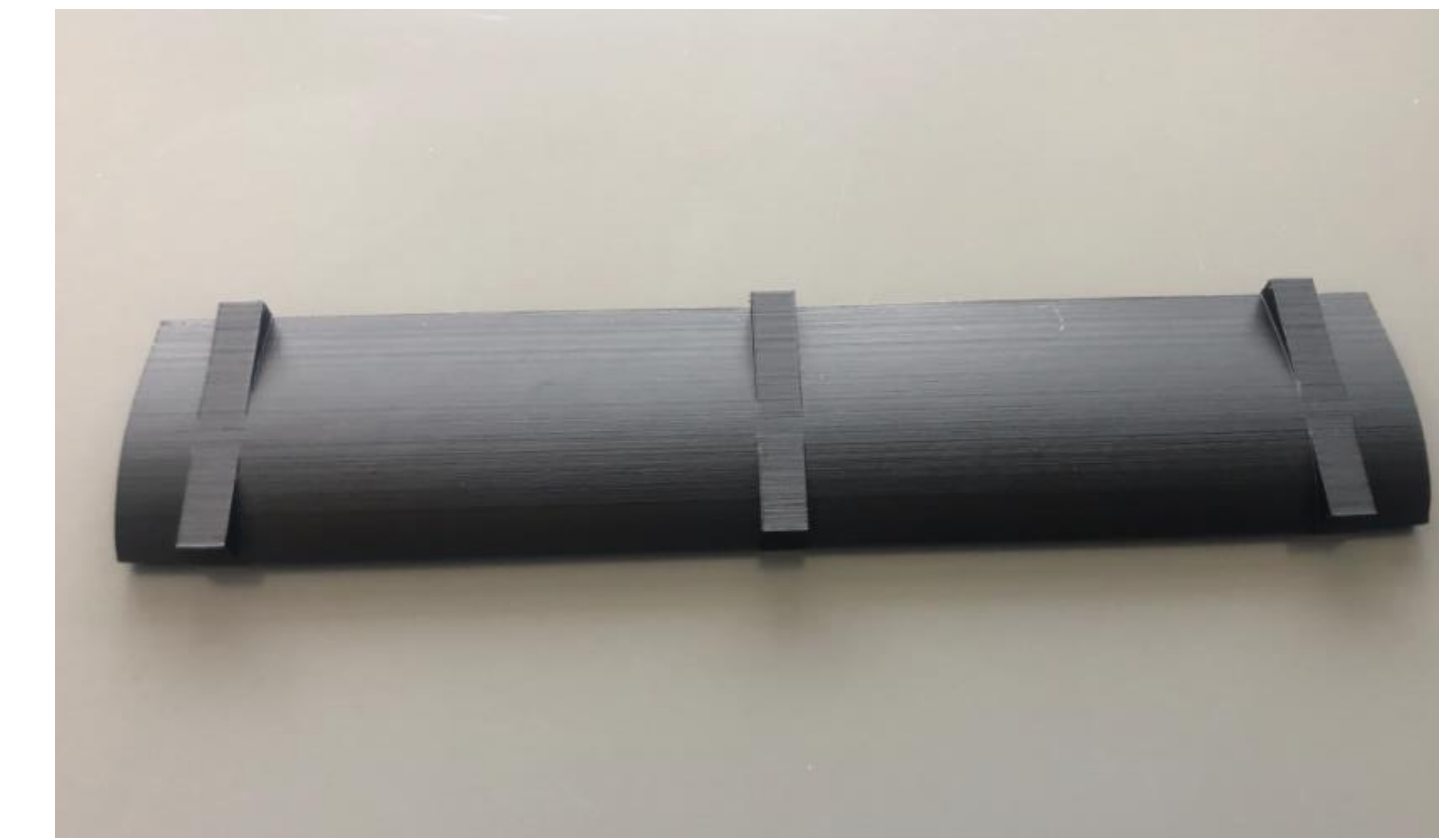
3D Printed Smooth Sample (Before Testing)
